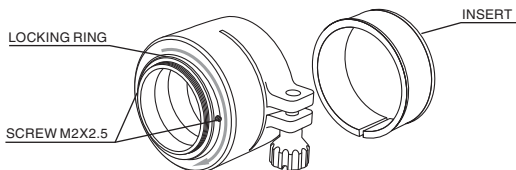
SCOPE MOUNTING SYSTEM
